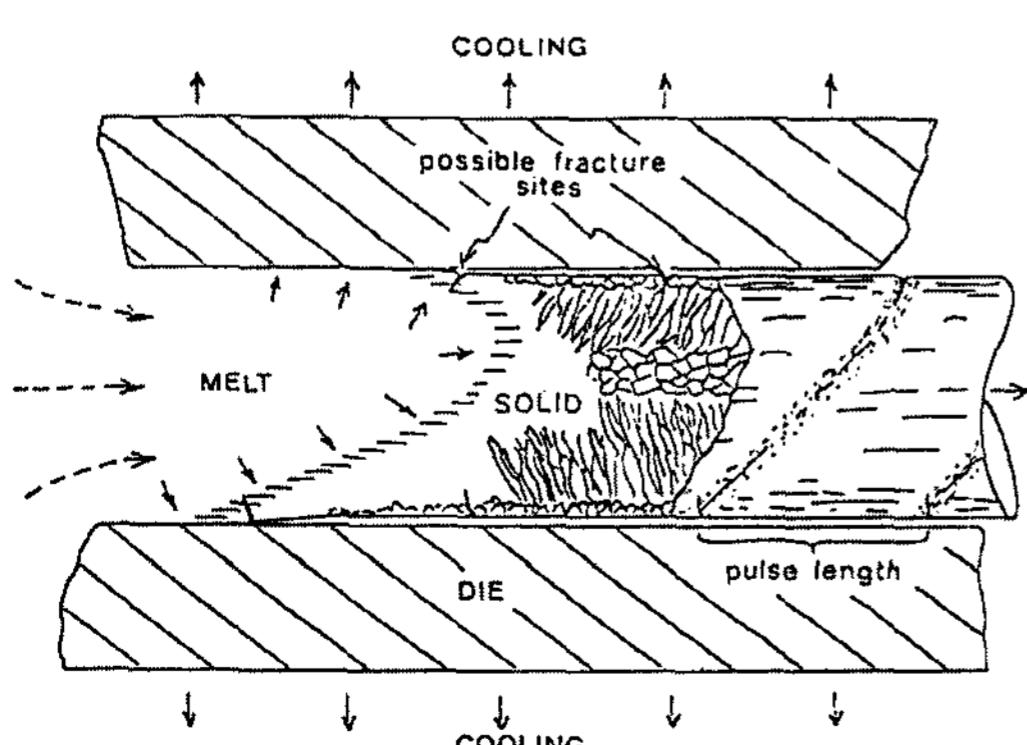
Solidification mode of horizontal continuous casting in graphite mould.
